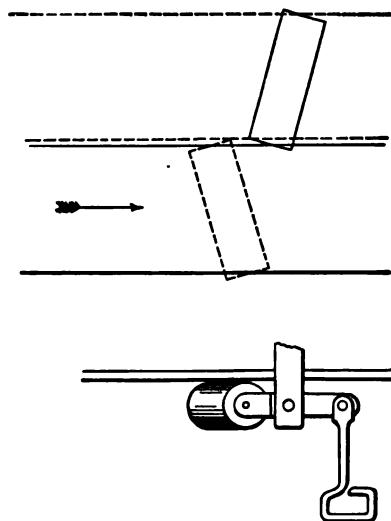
ROLLERS FOR SHIFTING HEAVY BELTS.
